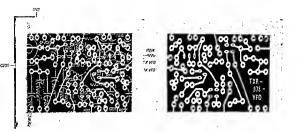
FULL-SIZE VFO BOARD LAYOUT
